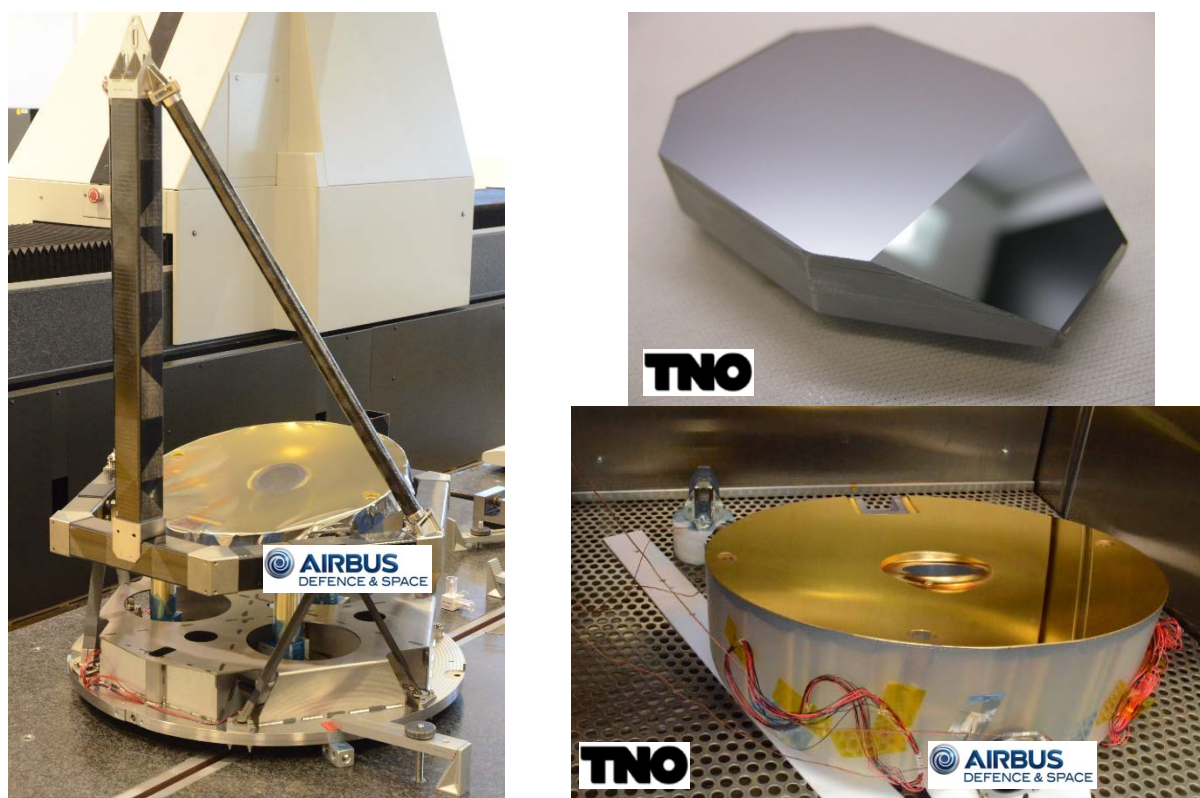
Left: Telescope Assembly structure at Airbus DS under the coordinate measurement machine. Right top: Facetted secondary test mirror enabling interferometric measurements. Right bottom: Primary test mirror after gluing of inserts and temperature sensors
